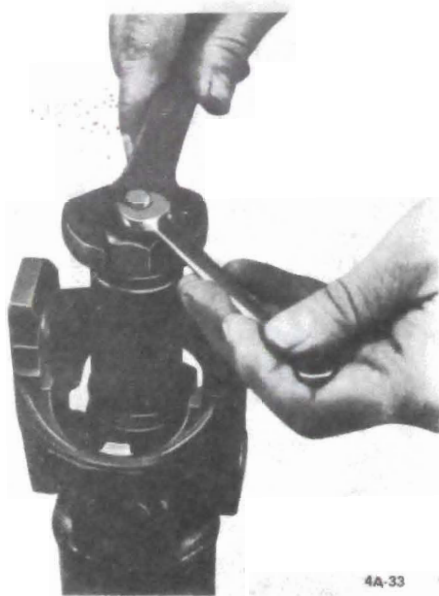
A-33 Third Step - Removing Centering Ball with Tool J-23677
